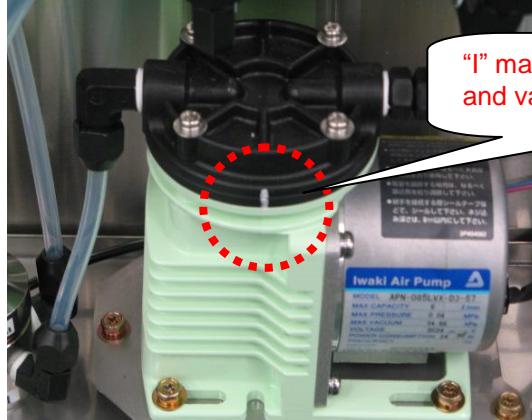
Alignment of valve sheet and pump head
